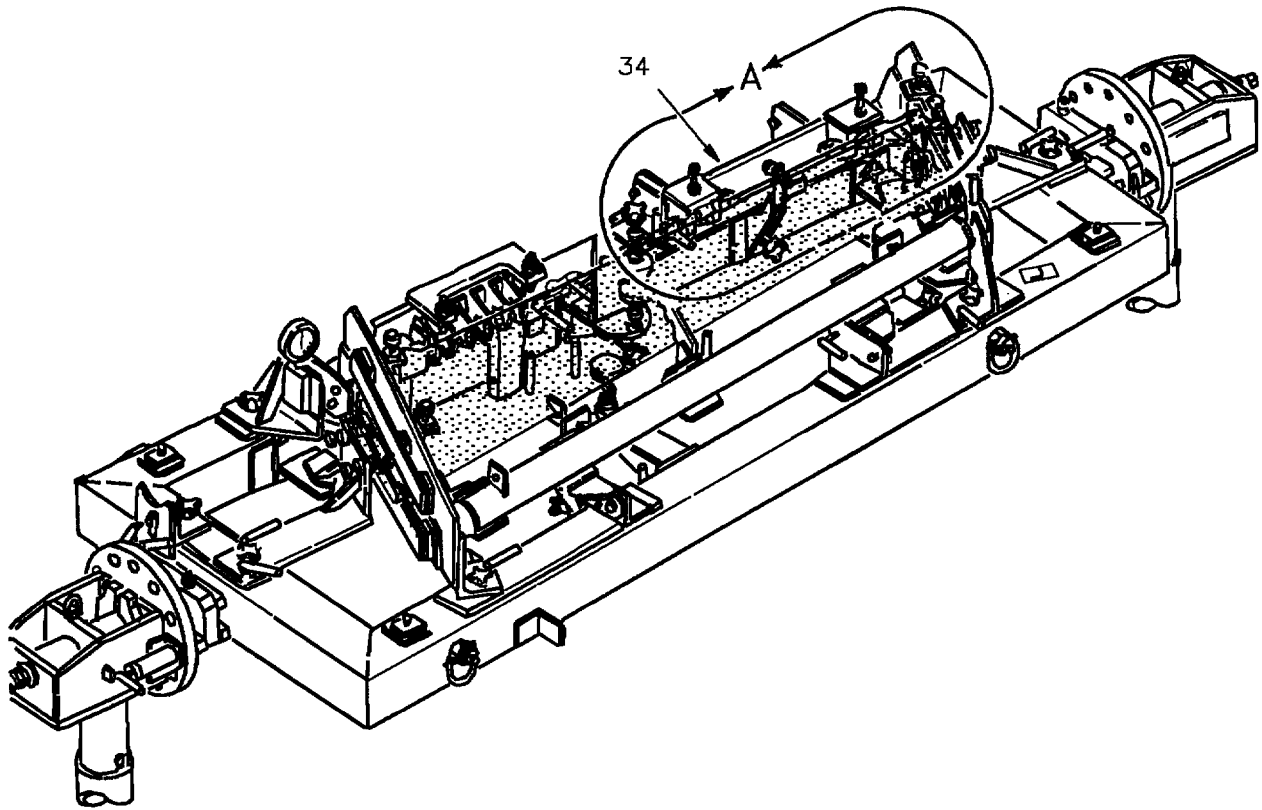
Idler Lug First Oversize Bushing Installation (Sheet 1)
